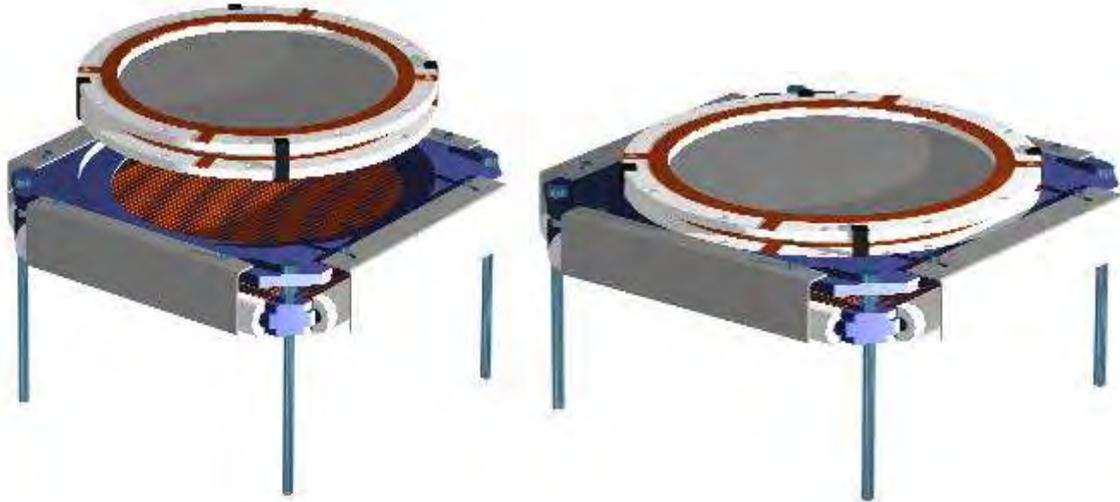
Assembly of MCP-stack - Stage 4 (DLD40 & DLD80)
